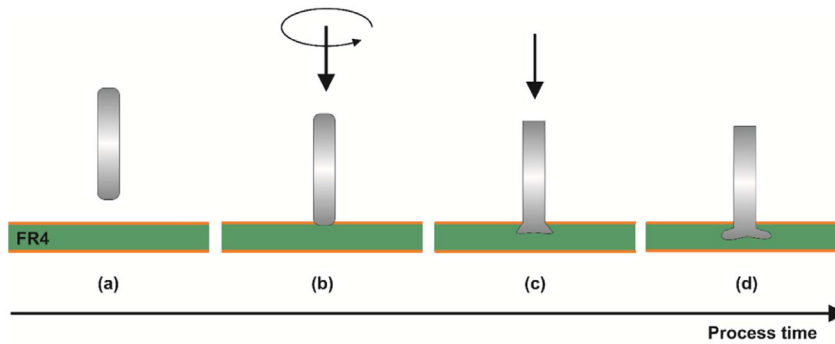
Schematic description of the Friction Riveting process steps applied on PCB: (a) positioning of the parts to be joined, (b) friction phase (plunging of the rotating rivet through the PCB upper part), (c) forging phase (plastic deformation of the rivet), and (d) joint consolidation.
